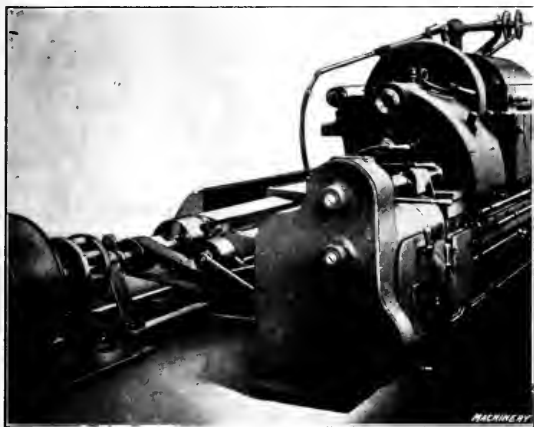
Left-hand End of Roll Grinding Machine showing Arrangement of Motor Drive
